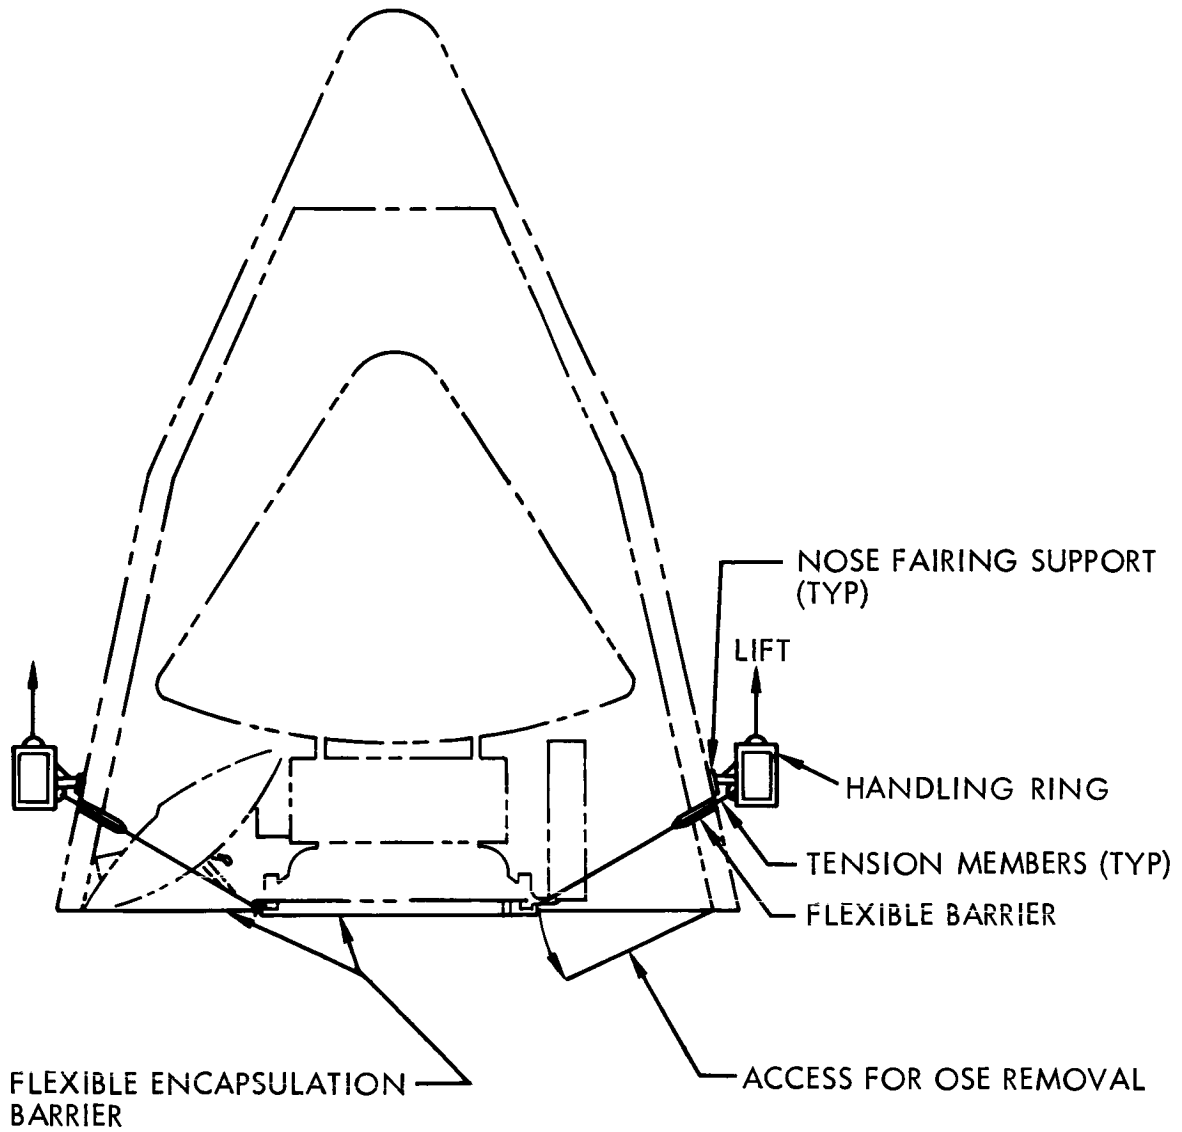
Encapsulated PV Lifting Fixture — Alternate
